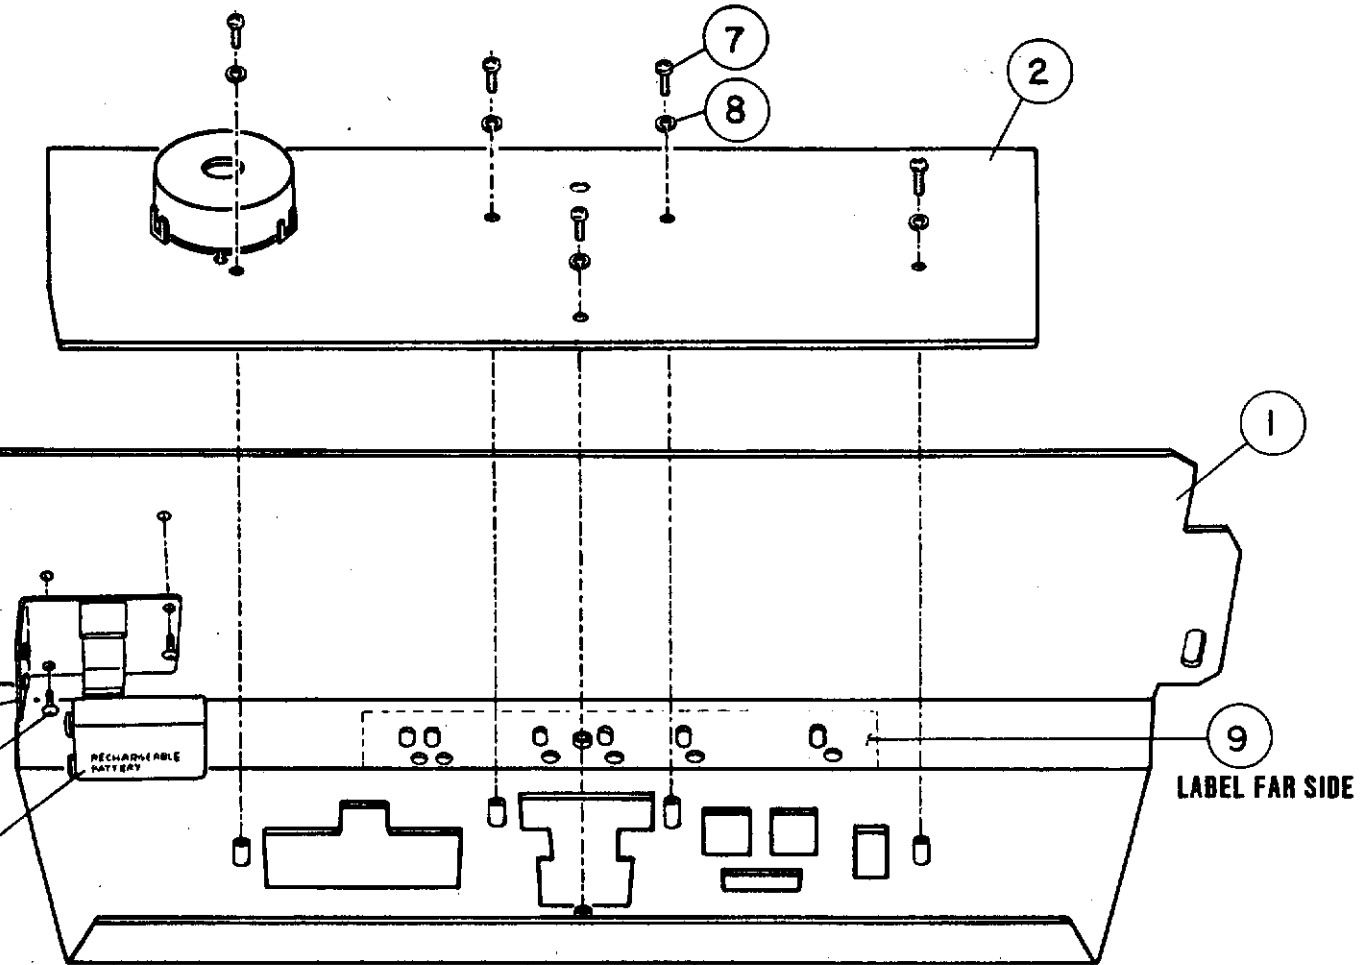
PARTS LOCATION DIAGRAM, CONTROLLER ASSEMBLY
